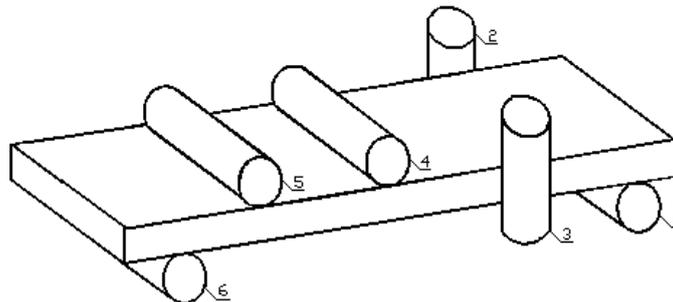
Spindle arrangement of the applied type Unimat CLASSIC planing machine; 1, 6 – heads forming the top side of boards, 2, 3 – tongue and key profile milling cutters; 4 - disc cutter for relief grooves, 5 – head forming the bottom side
